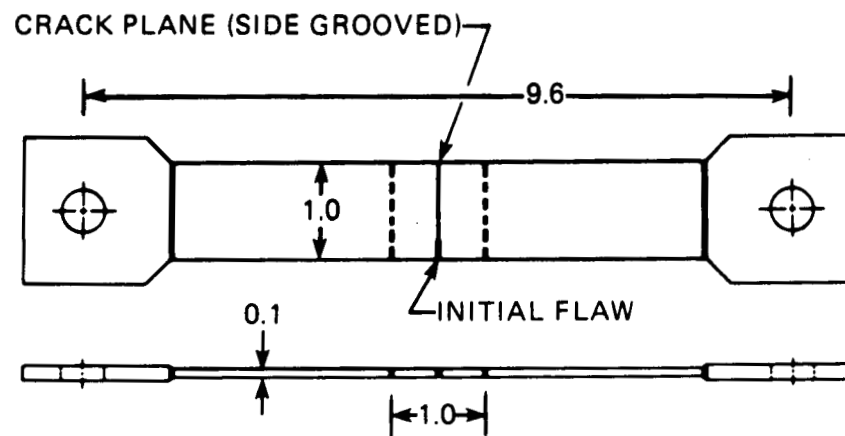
Wide-plate crack-arrest specimen and pull-plate assembly.
